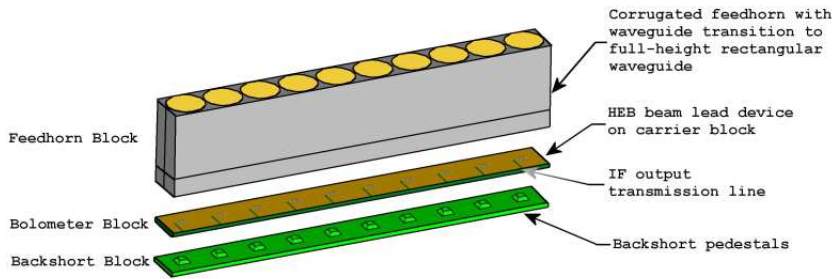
Assembly Drawing of a 1.5 THz Array Mixer Block
